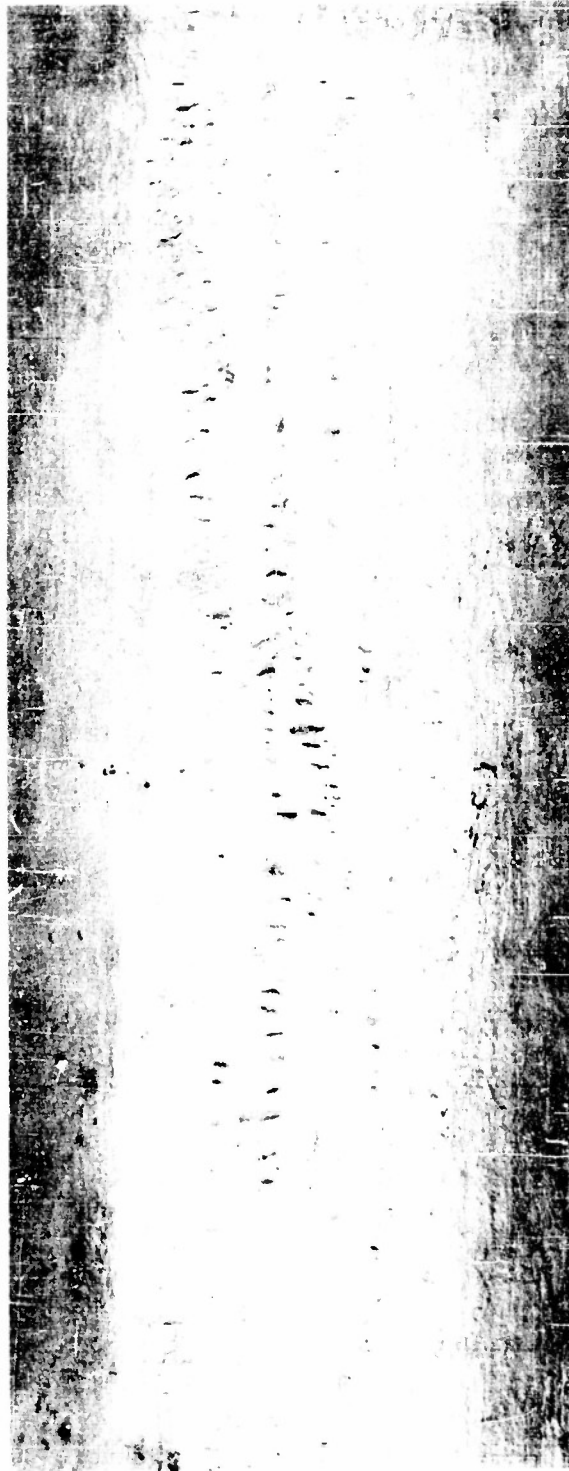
SURFACE OF EXTRUDED BILLET, X1
